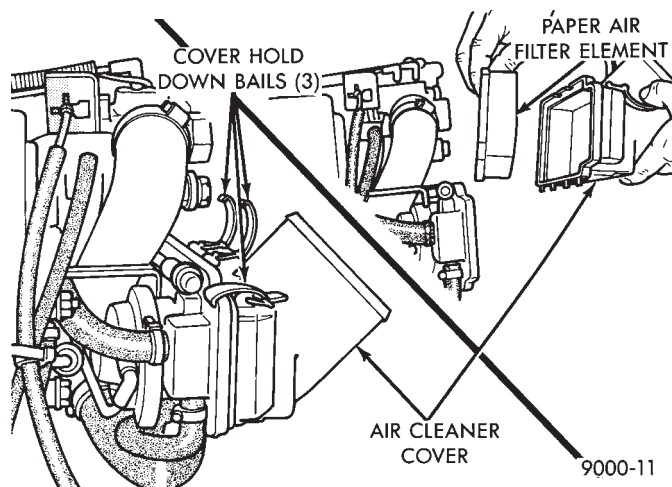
Air Cleaner Assembly—2.5L Turbo Engine
